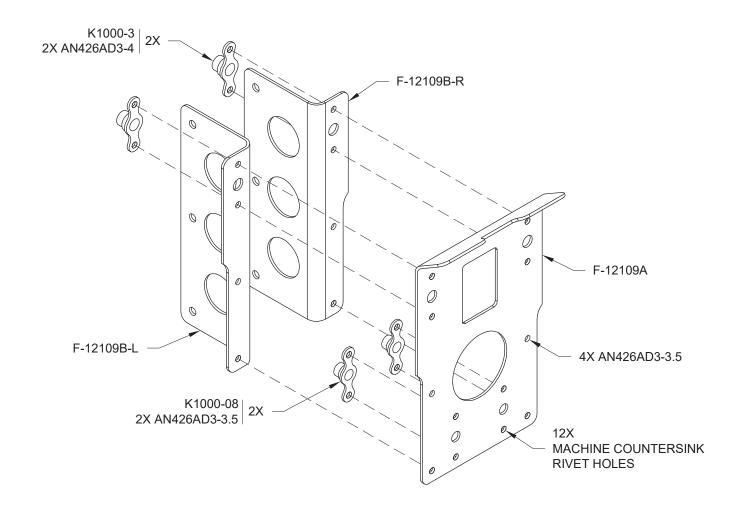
RIVETING THE F-12109 ASSEMBLY
